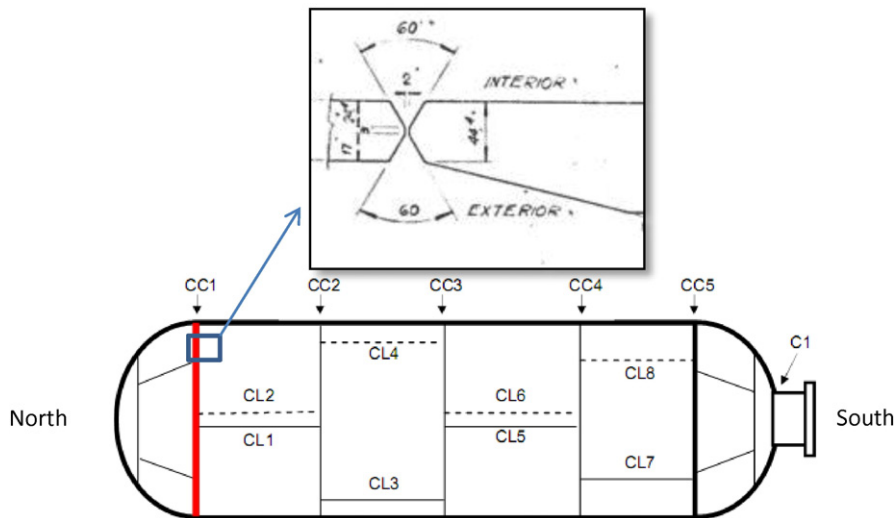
Cracked vessel. Inset: detail of the Cap – surround welded joint.
